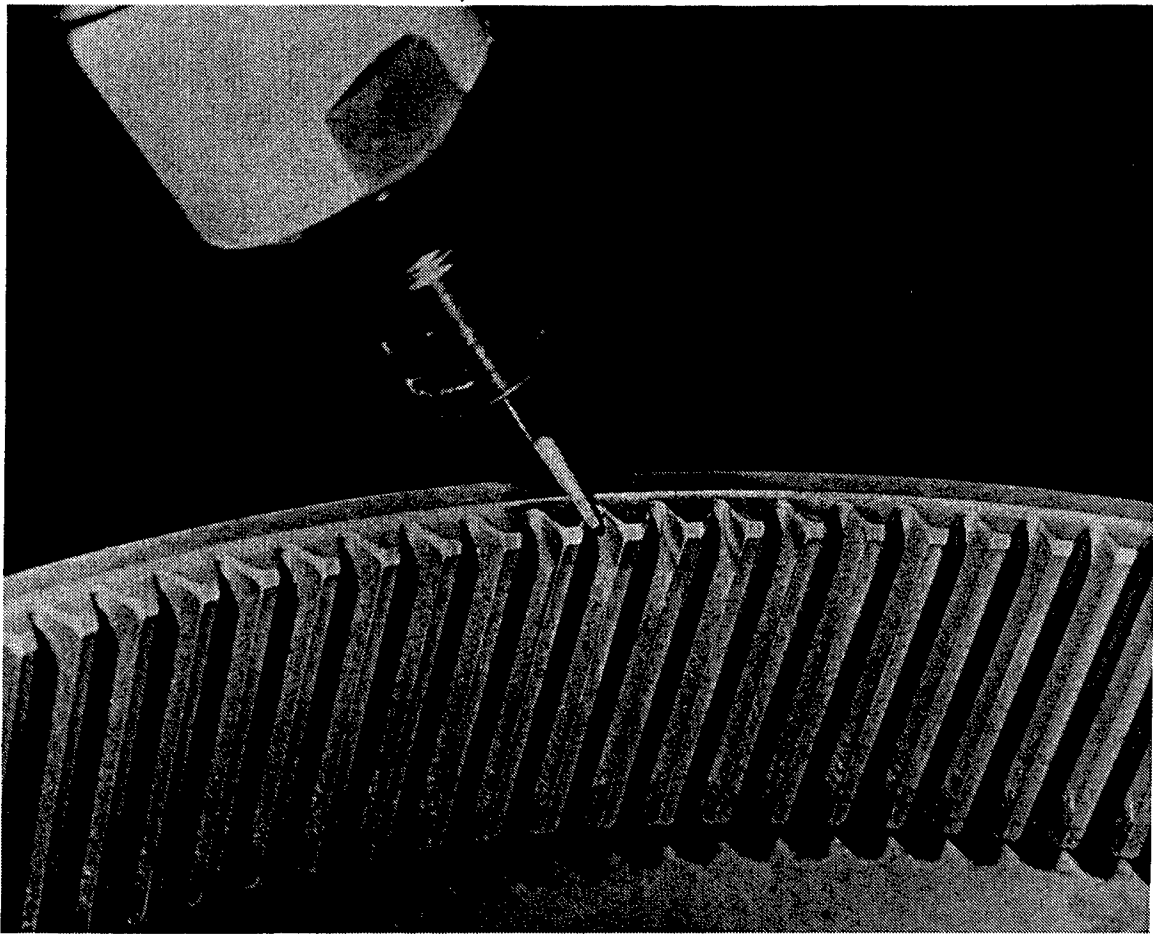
Gear Tooth Deburring, Ring Gear Assembly
